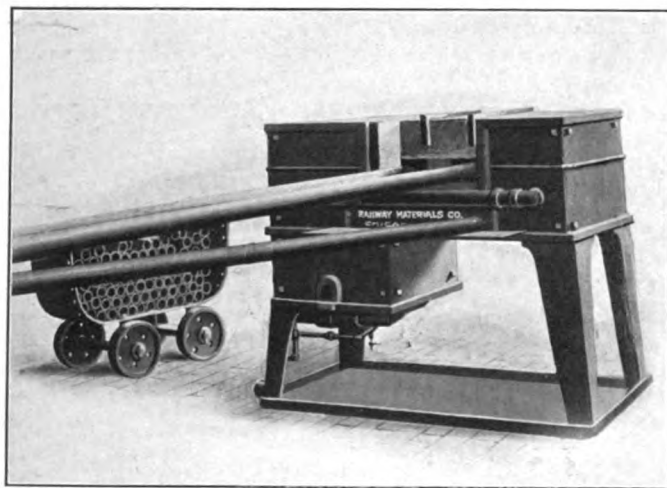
Ferguson Flue Welding Furnace.
